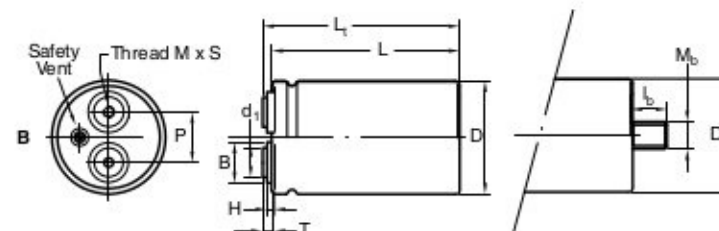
B: High current M6 disc: screw terminal (ST) and screw terminal bolt nut (STB)
